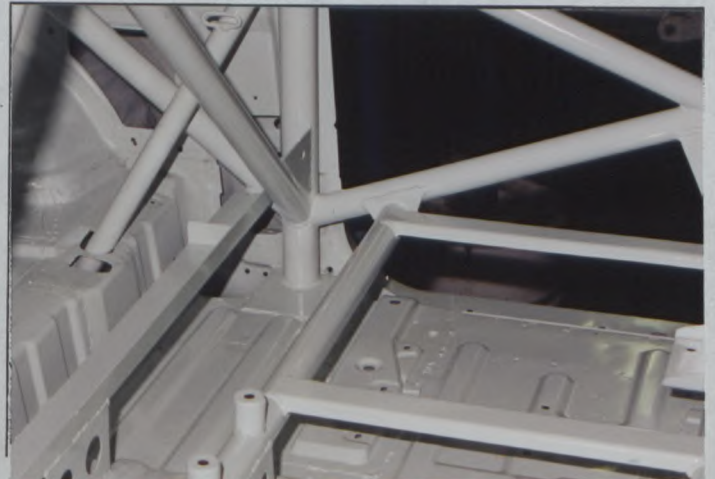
MAIN HOOP TO FLOOR-RIGHT
